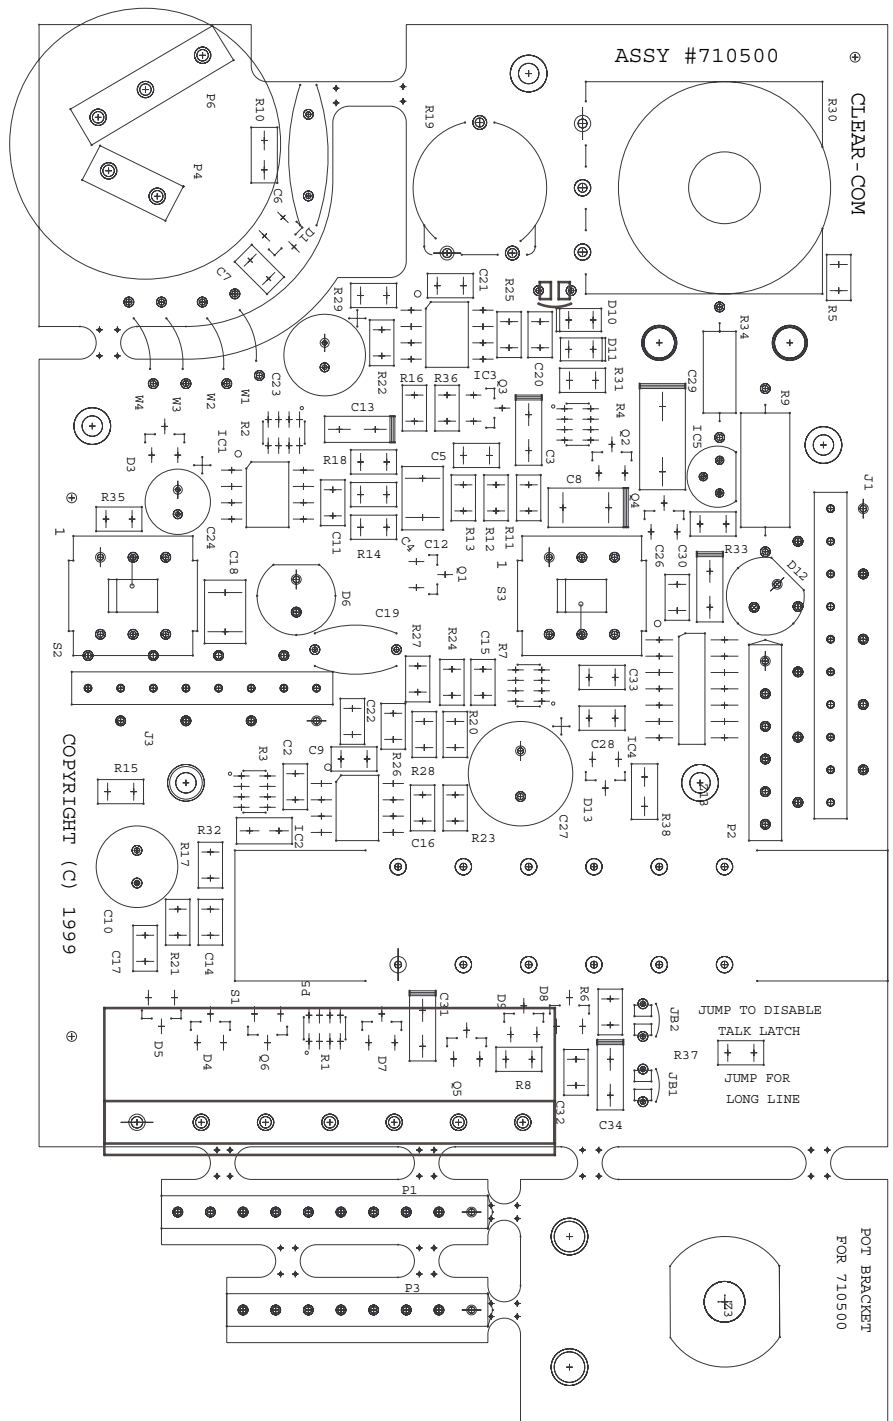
ICS-24 Main PCB Component Layout (part no. 710500)
